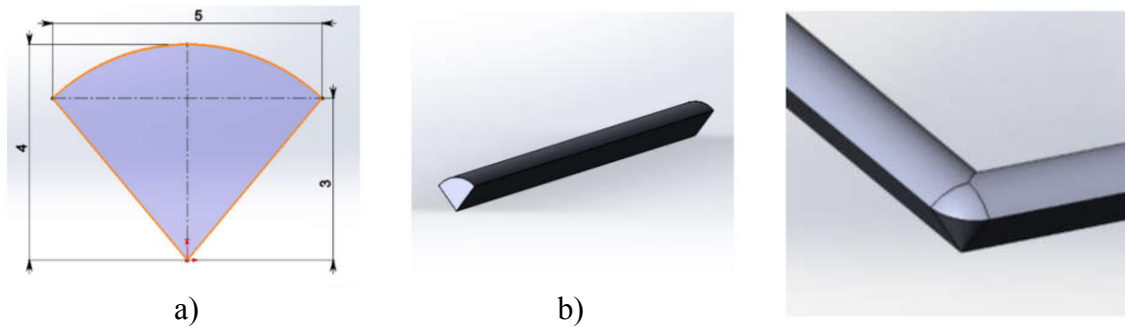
V-shaped seam: a) sketch; b) geometric model
